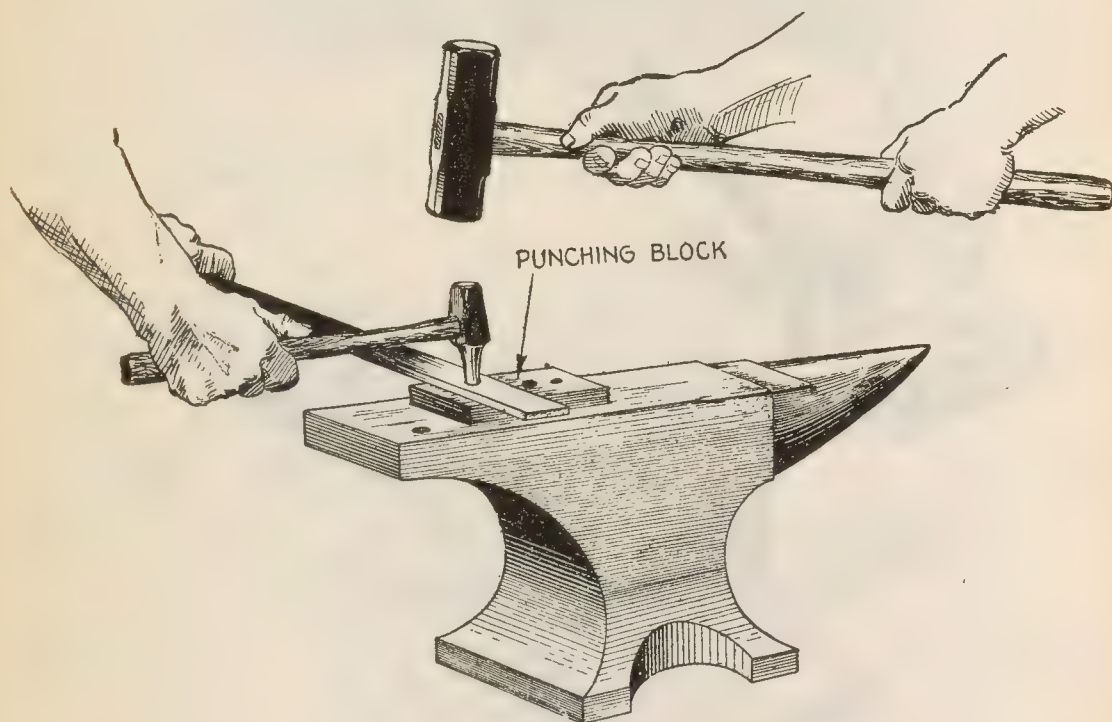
,972.—Punching. Place punching block in hardy hole on anvil, locate work on punching block so that the disc or slug punched out of the metal will pass through one of the holes in the punching block. Hold work with one hand and punch with the other while the helper strikes the punch with a sledge as shown.
